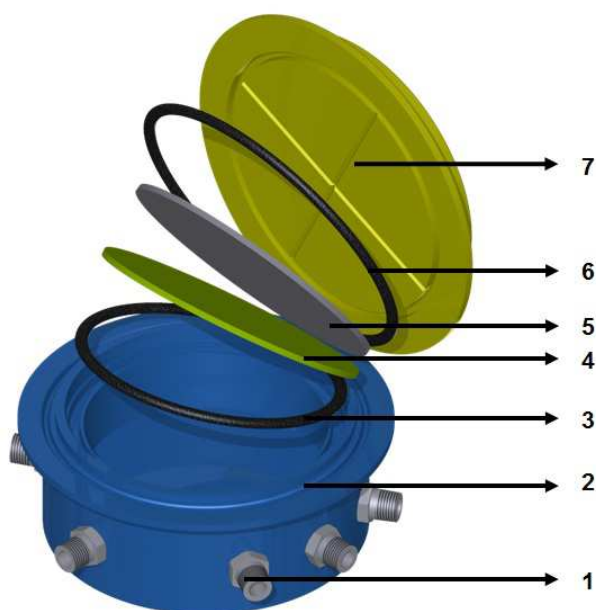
Stirred tank reactor/membrane separator (m-CSTR) layout. Legend: 1 - Inlet/outlet ports; 2 - Feed/retentate chamber; 3 – Inner o-ring; 4 – Membrane; 5 - Sintered plate; 6 - Outer o-ring; 7 - Cover. Adapted from [117].
